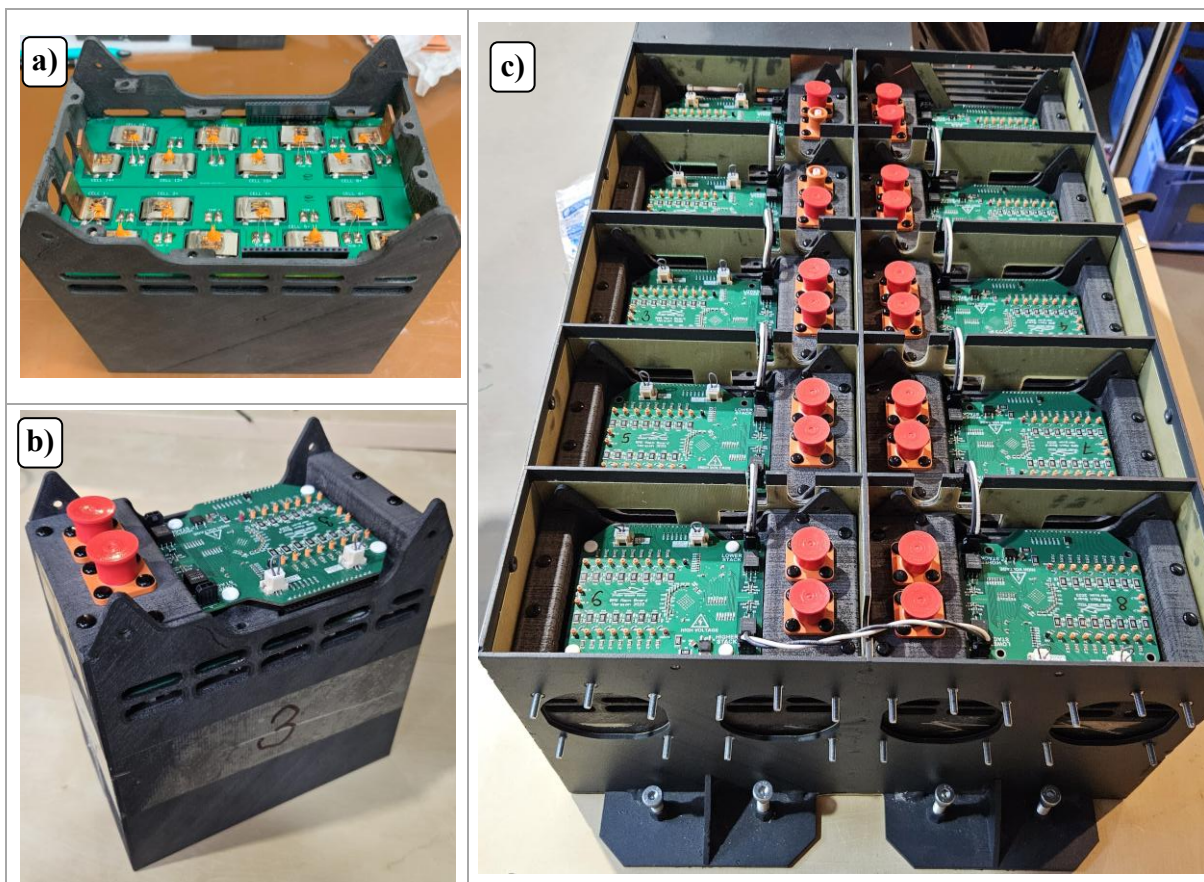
After-welding assembly – a) module with temperature sensors before cover placement, b) final assembled module, c) final assembled battery system
